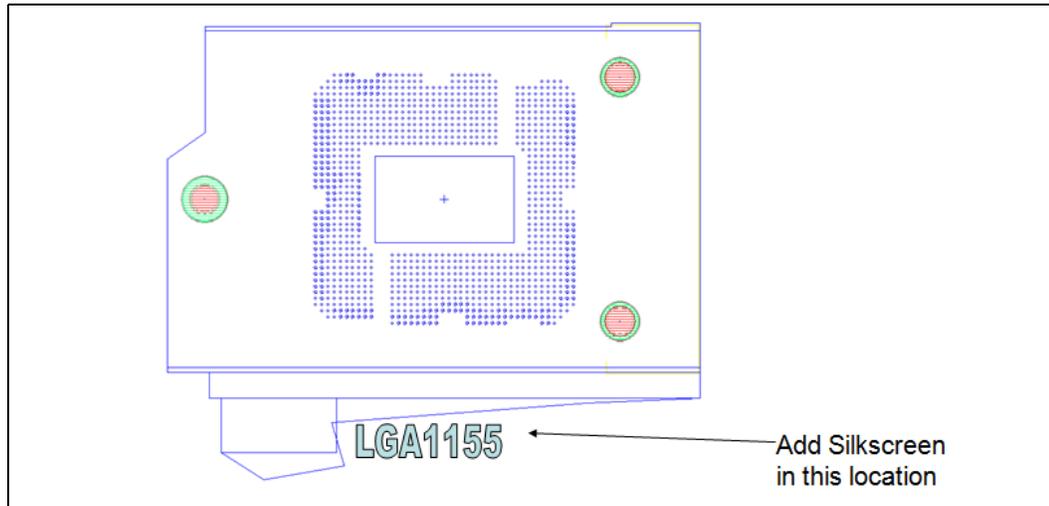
LGA1155 Socket Land Pattern (Top View of Board)
